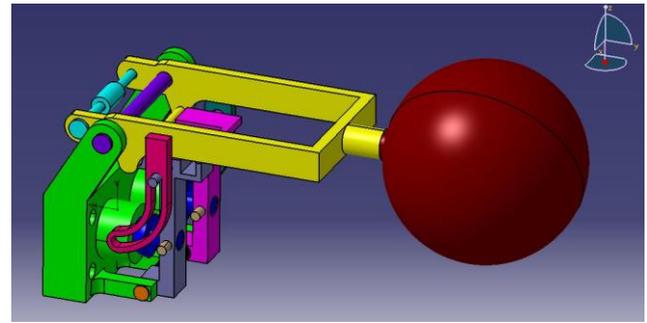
Selected 3 Dimensional Model of the mechanism as per the earlier design
